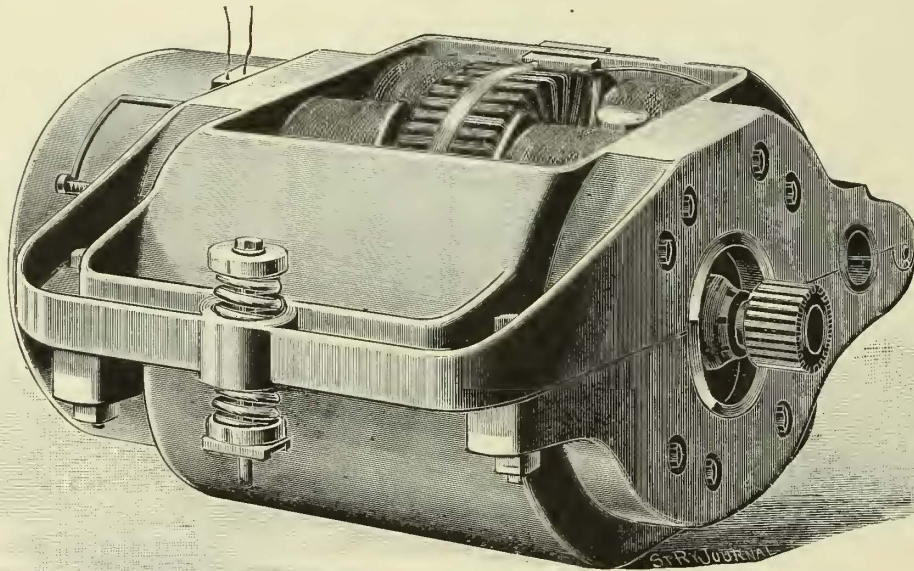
VIEW OF SHORT SINGLE REDUCTION MOTOR, IMPROVED TYPE.
